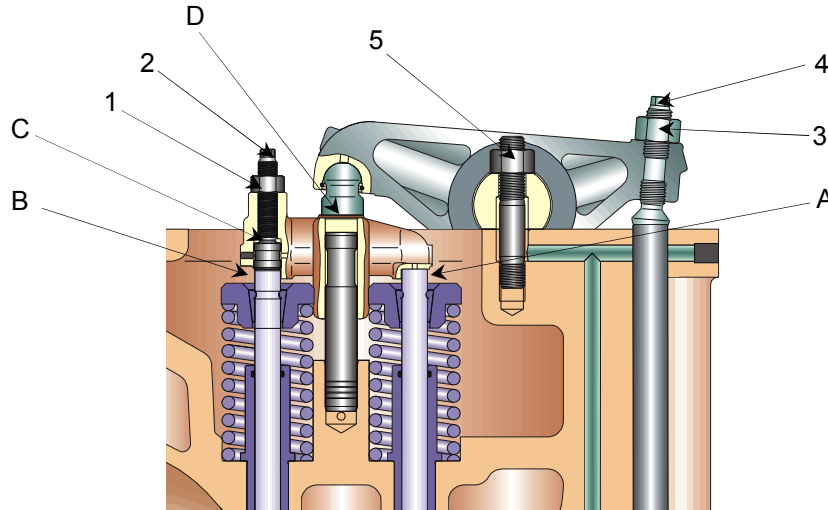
Adjustment of valve clearance (밸브 틈새의 조정)
